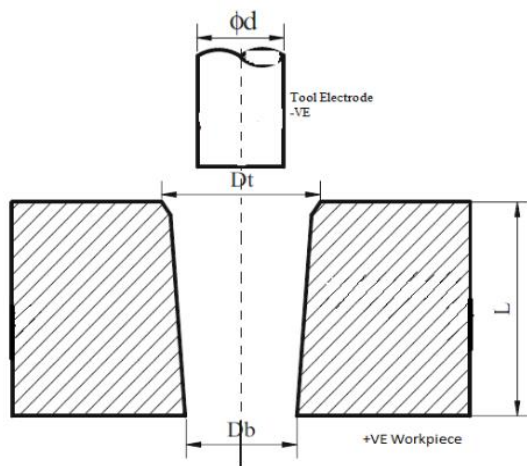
Schematic cross-sectional view of EDMed micro drilled hole. [11]
